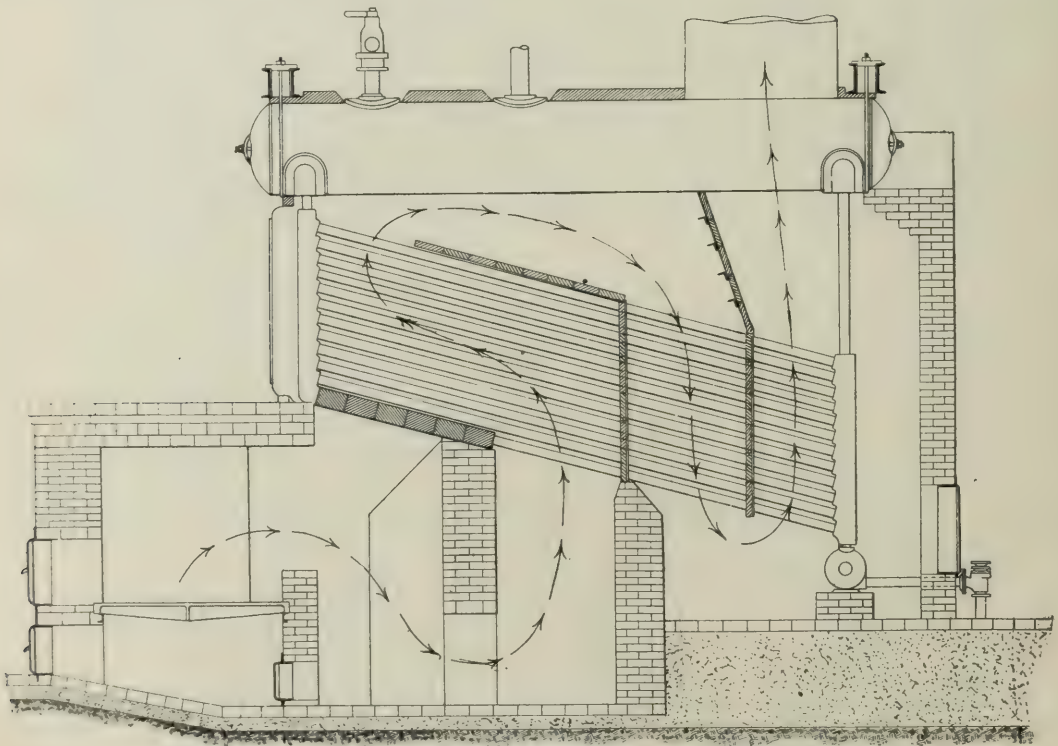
ELEVATION SHOWING WOOLLEY FURNACE UNDER WATER TUBE BOILER.
